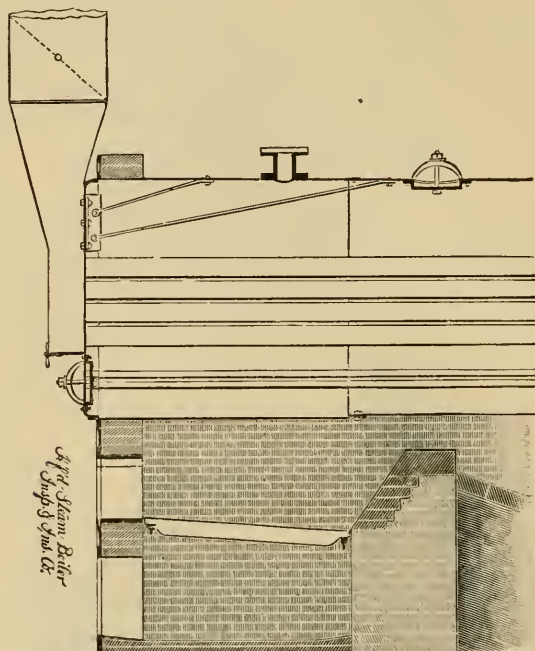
BOILER FRONT WITH BREECHING. SECTIONAL VIEW.
